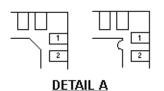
PCB Layout Guide for VQFN-20L 3.5x3.5 Package
